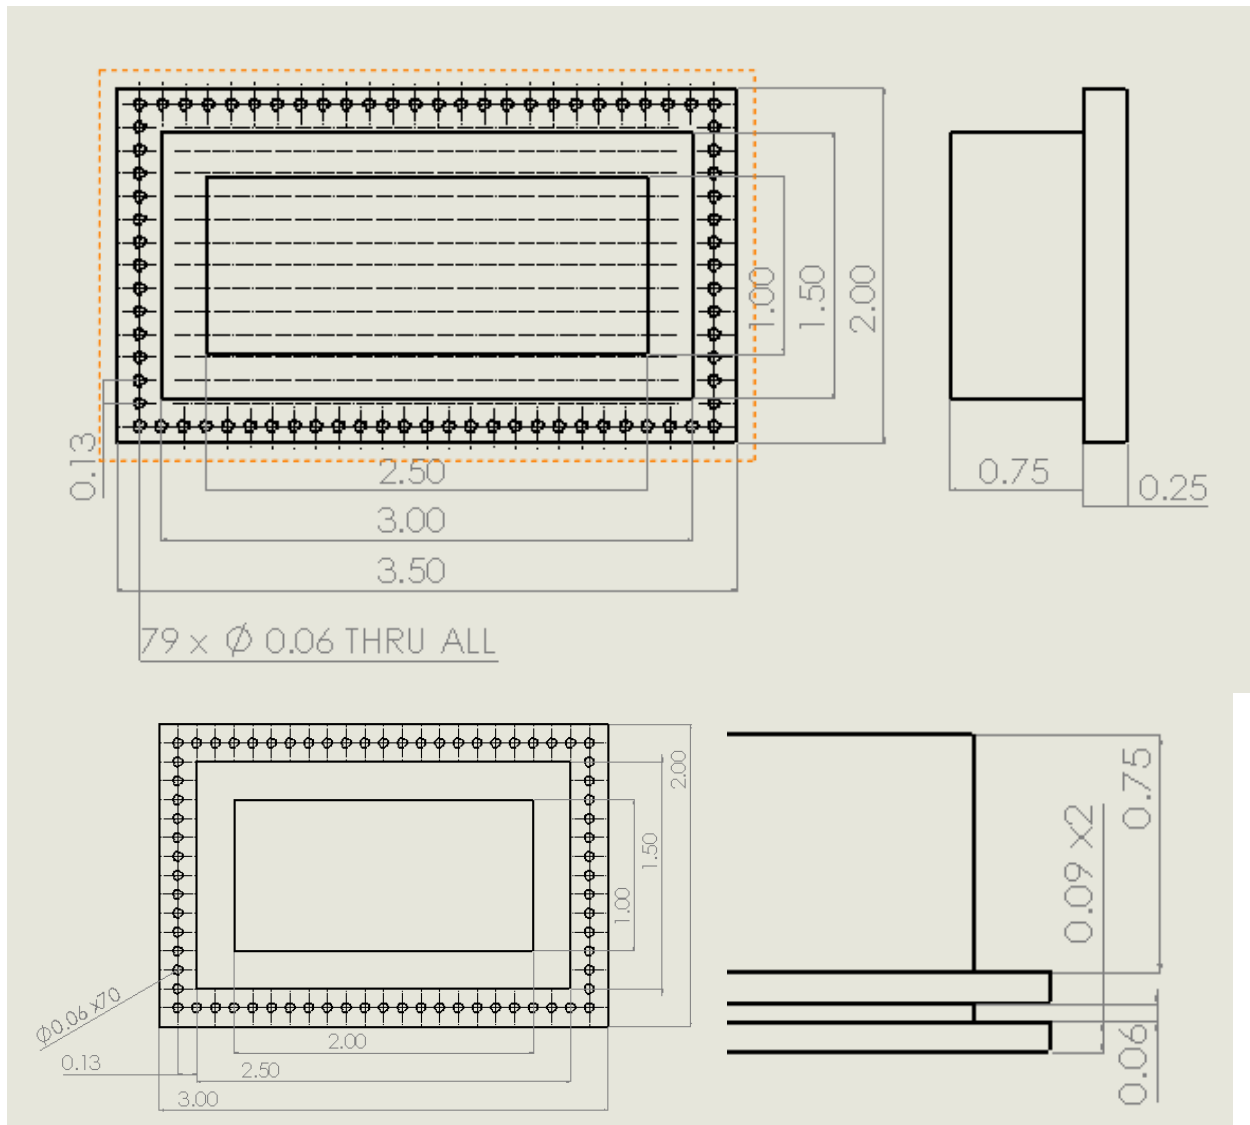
SolidWorks detailed drawings of the 3D printed attachment rings
